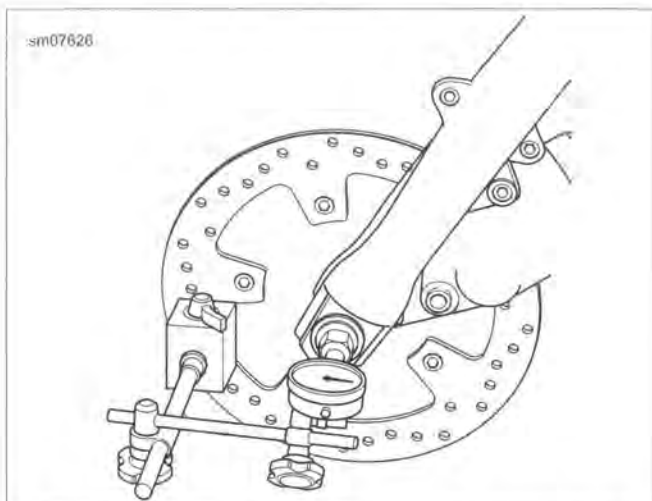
Wheel Bearing Inspection (Front Wheel Shown)
